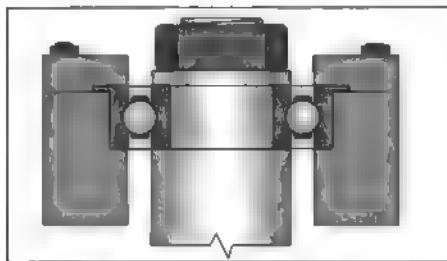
A flanged bearing held in place with a bolted-on cover plate.
